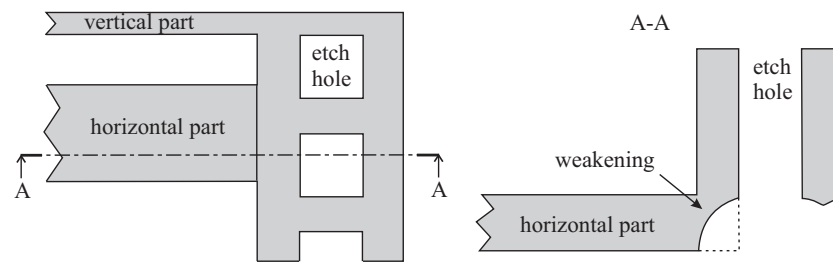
Schematic top-view showing the attachment of the L-torsion beam indicating cross-section A-A (left). Cross-section A-A showing the weakening in the attachment of the horizontal part (right).
